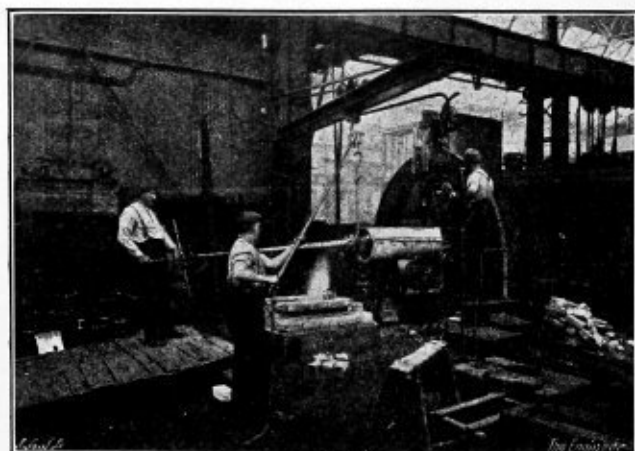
PNEUMATIC FLUE WELDING HAMMER
